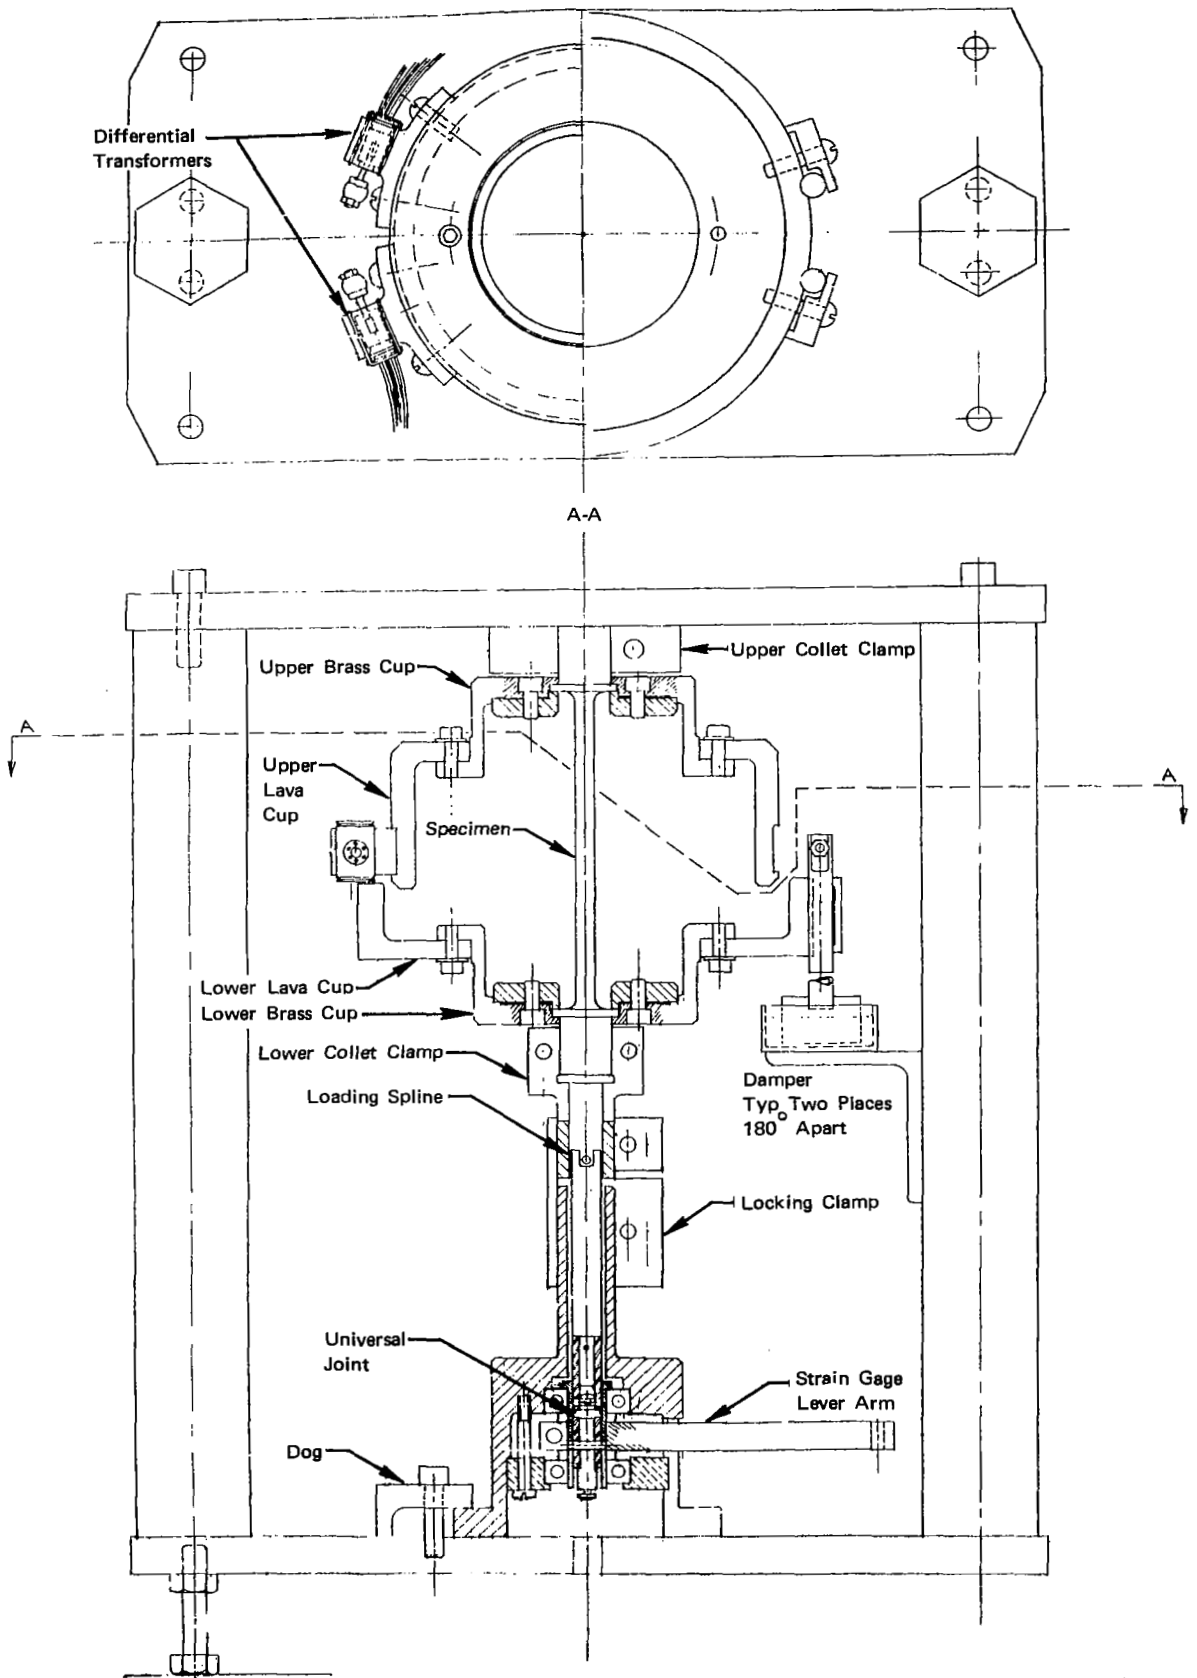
MICROSTRAIN TEST APPARATUS ASSEMBLY DRAWING
